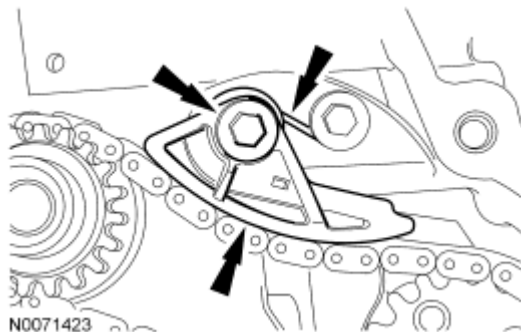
Locating Oil Pump Sprocket Bolt
